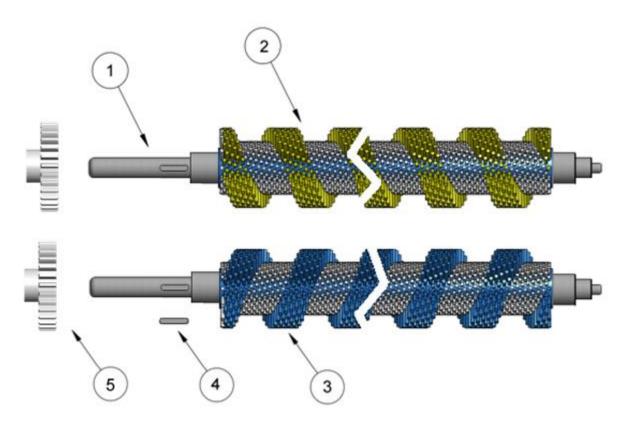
Picture with key - Cleaning sorting conveyor BRM [Brush bearing]
